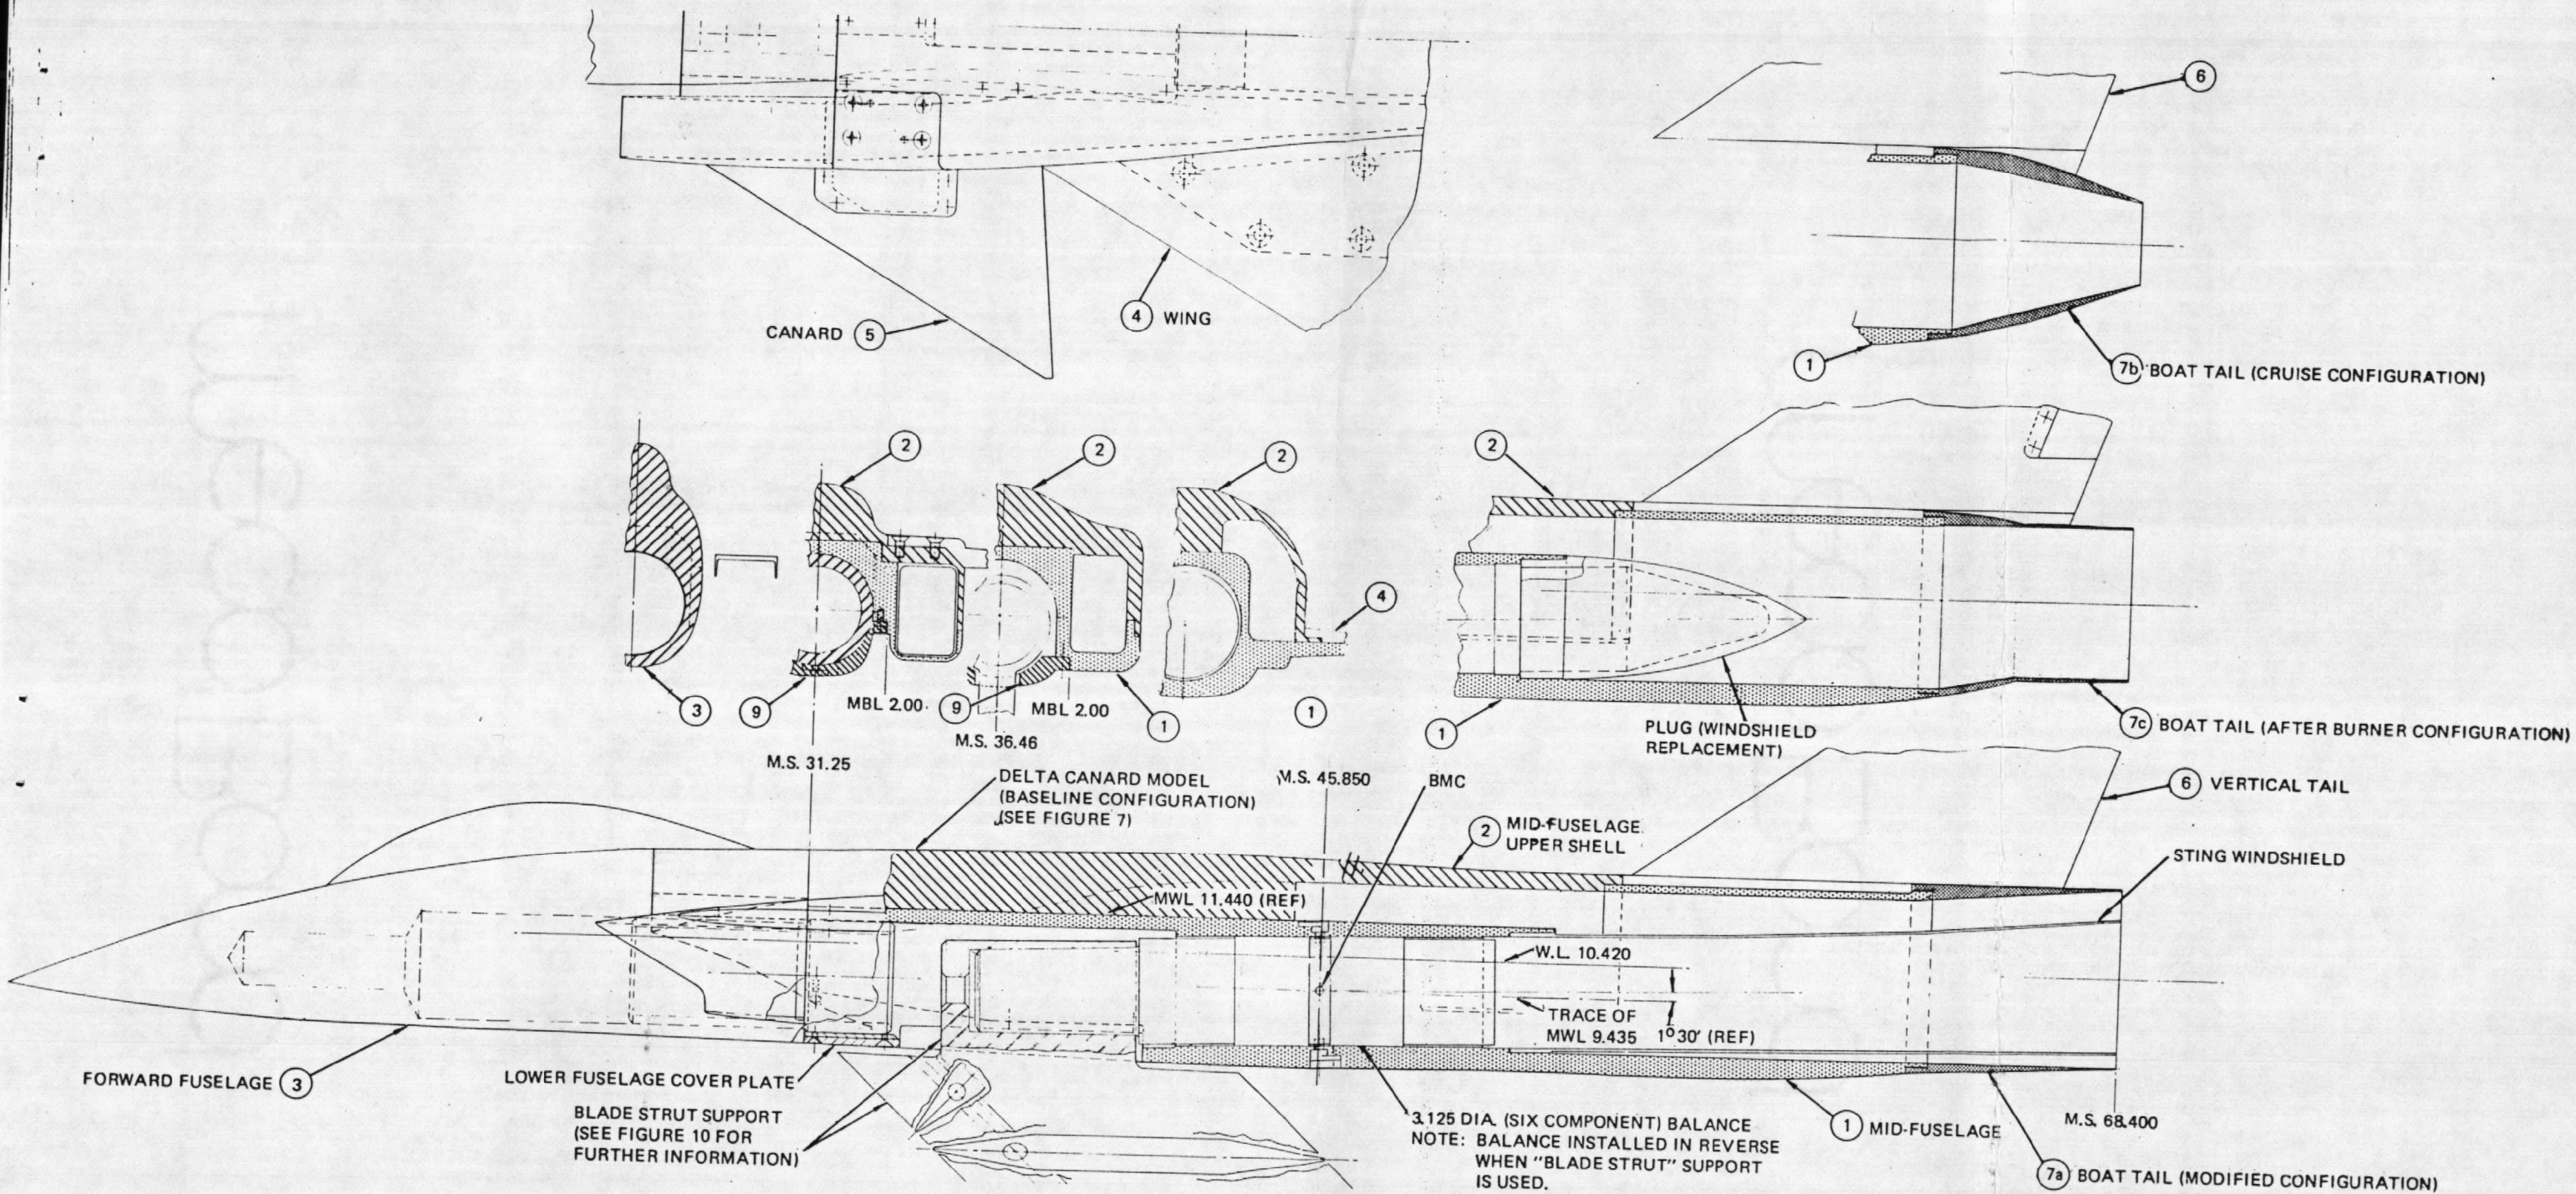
Delta Canard Model Assembly - Blade Sting Support
